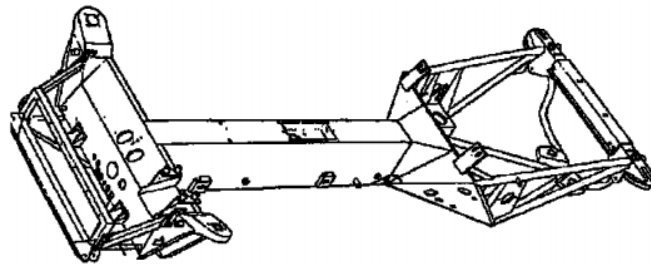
Sheet steel backbone Chassis (courtesy Lotus Car Ltd) [3]
